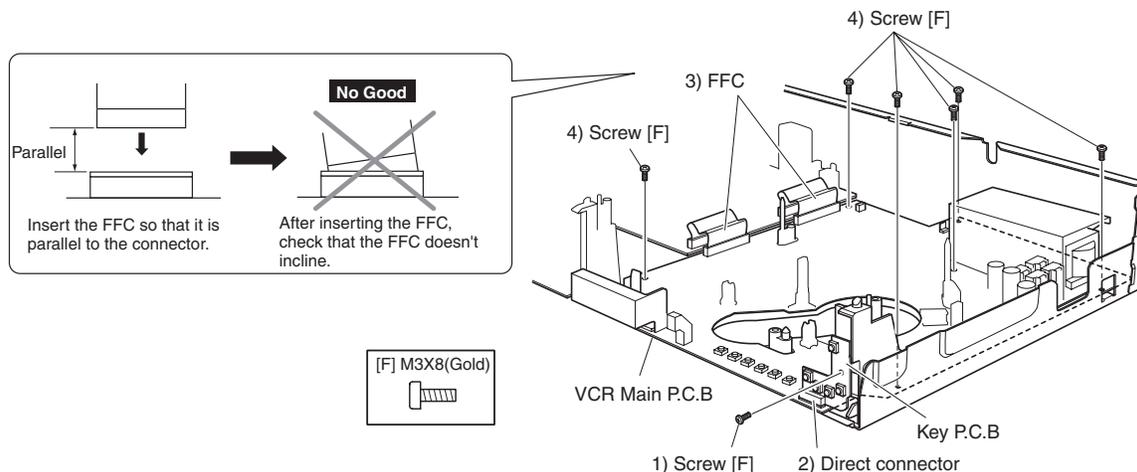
Key P.C.B and VCR Main P.C.B
